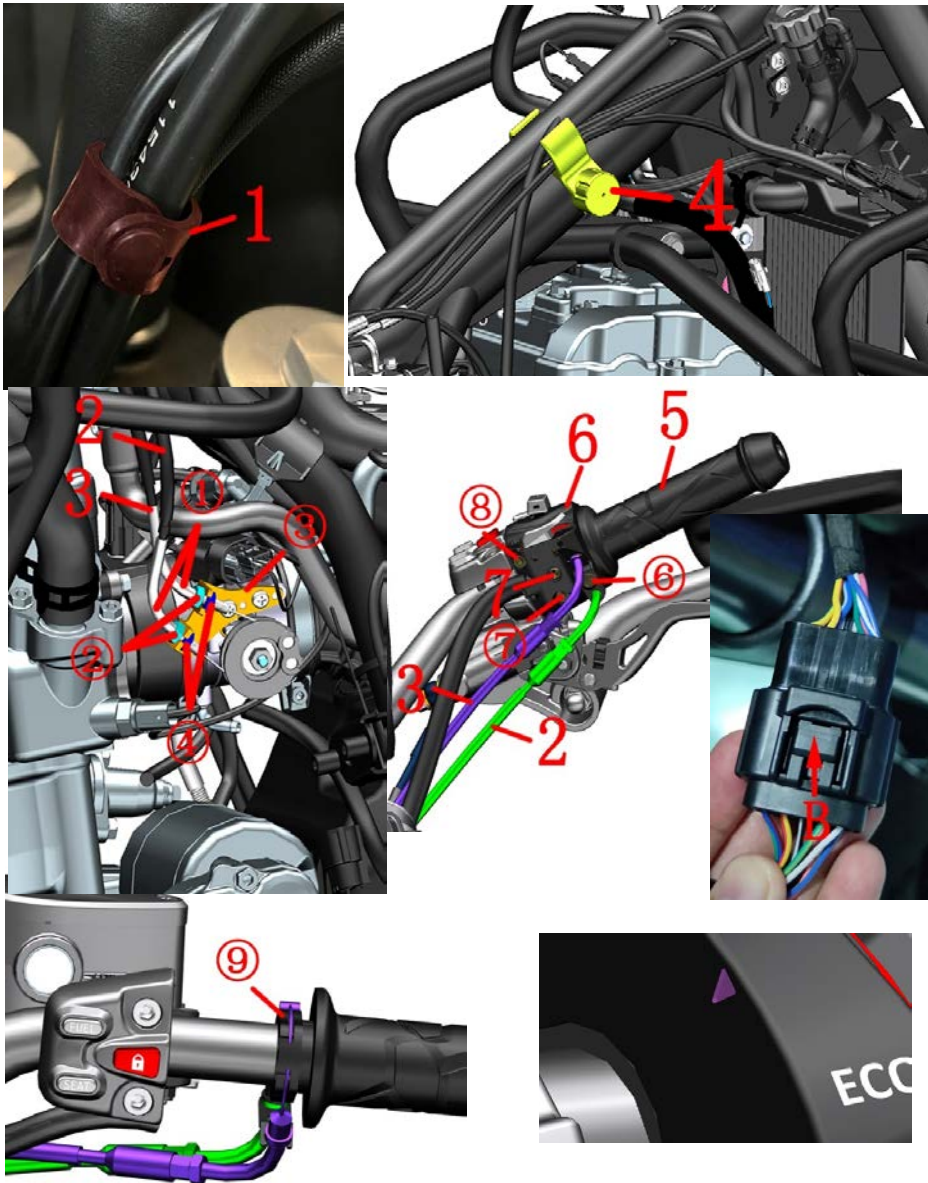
Front Fork Assembly		Replace Throttle Cables	CHK	CAUTION
